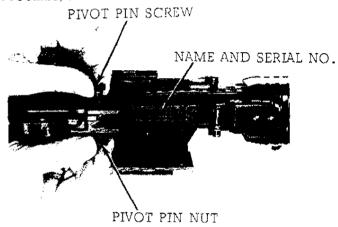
REMOVING THE PIVOT PIN SCREW AND PIVOT PIN NUT
